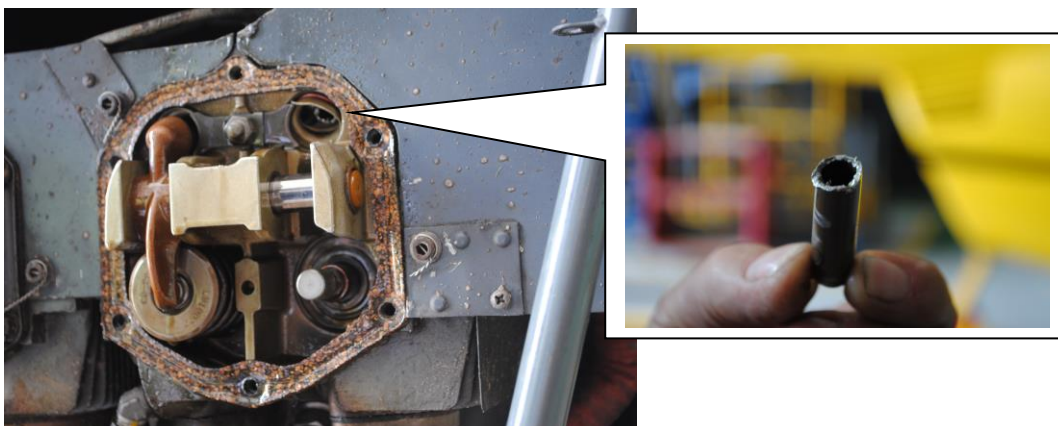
and Inset: A view of the broken part of the No. 1 cylinder exhaust pushrod
